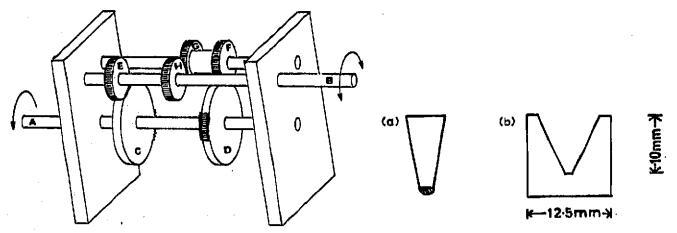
'Lost motion' gear box. A = Continuously rotating drive shaft coupled to the motor.B = Output shaft reciprocating through 180°. The needle bar is coupled directly to this shaft.C and D = Toothed wheels having a large fraction of the teeth ground away. Sufficient teeth are left to rotate shaft B through only 180° when meshing with wheel E or gear train F, G, H.The elapsed time between the forward and reverse strokes is set by the relative position of the toothed sections of C and D.
